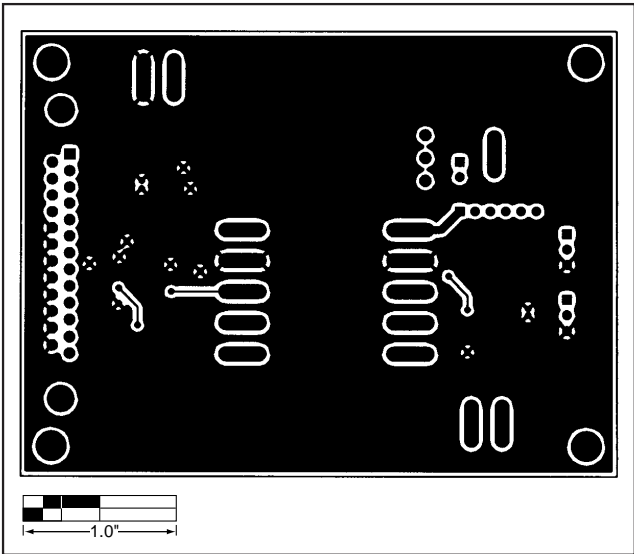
MAX1617 EV Kit PC Board Layout—Solder Side
